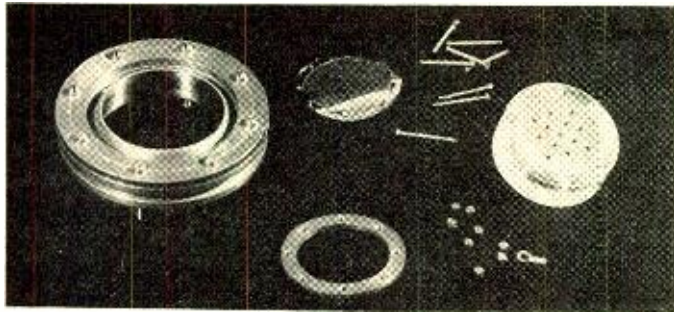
A dismantled capsule with a discarded diaphragm. Assembly on left is diaphragm mounting jig.
